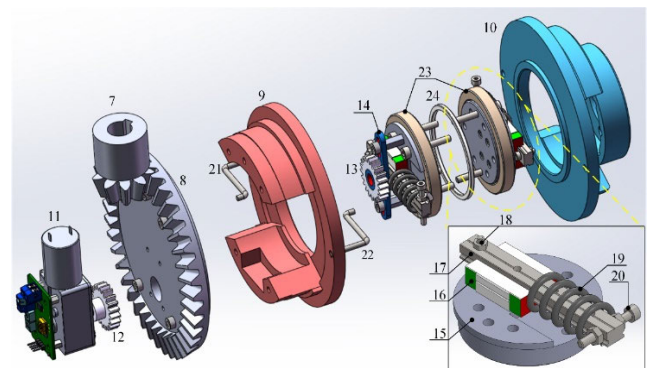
Explosion view of the main rotating module. 7-8: bevel gears, 9-input frame, 10-output frame, 11-stiffness adjustment motor, 12-driving gear, 13-driven gear, 14-transmission beam, 15-stiffness adjustment frames, 16-slider, 17-guide rail, 18-guide rail limit bolt, 19-spring, 20-spring limit bolt, 21-22: ropes, 23-small bearing, 24-ring, 25-encoder.
